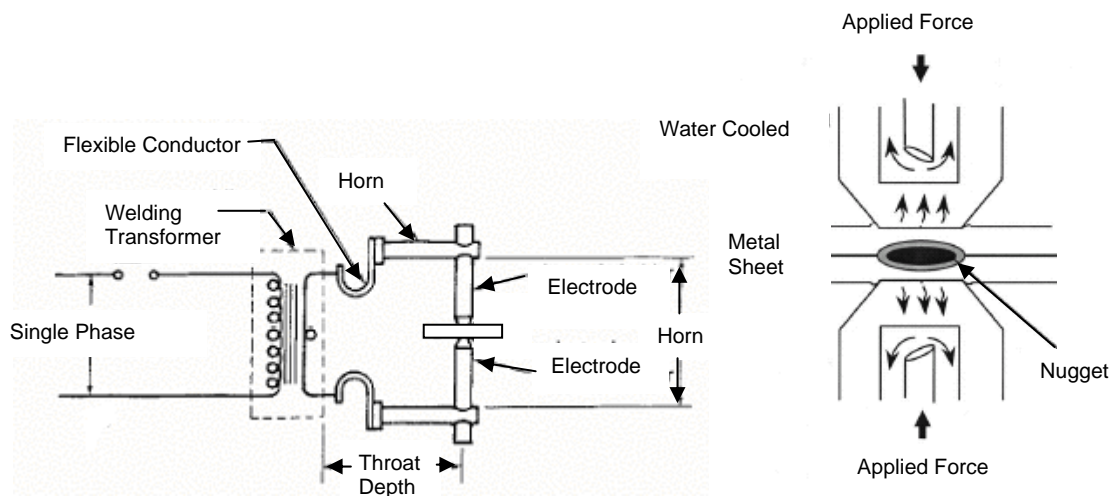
Schematic diagram of resistance spot welding.
